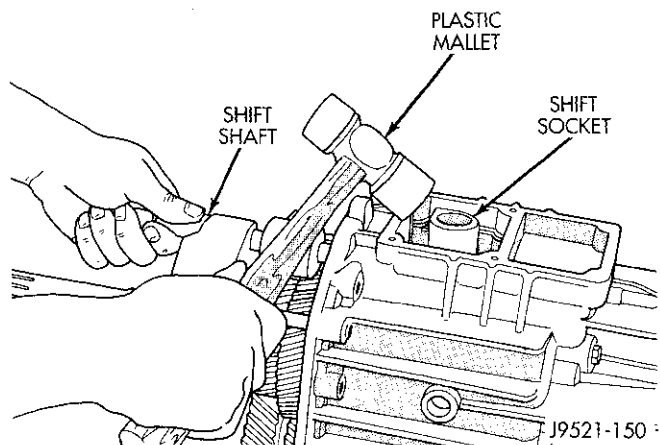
Pulling Shift Shaft Out Of Housing, Shift Socket, And Shift Forks
